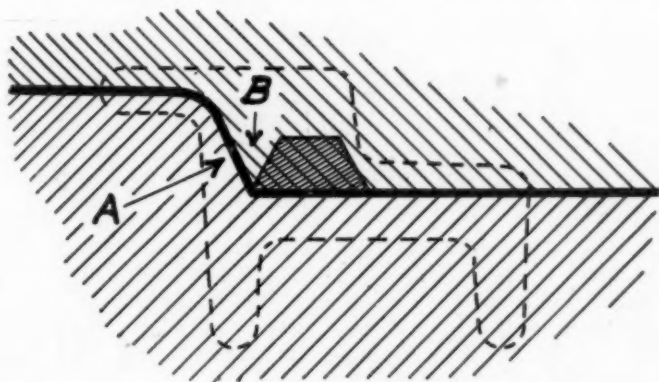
UNDESIRABLE PARTING DUE TO SHAPE OF RUNNER
